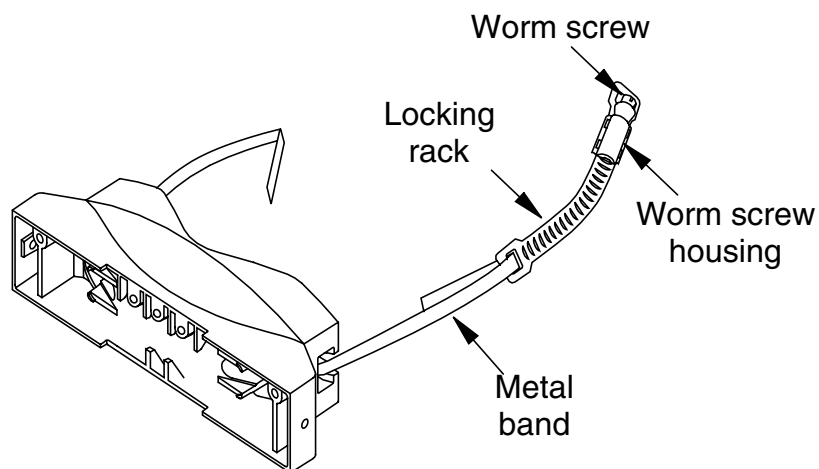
Pole bracket pre-assembled (large-pole mounting kit)
